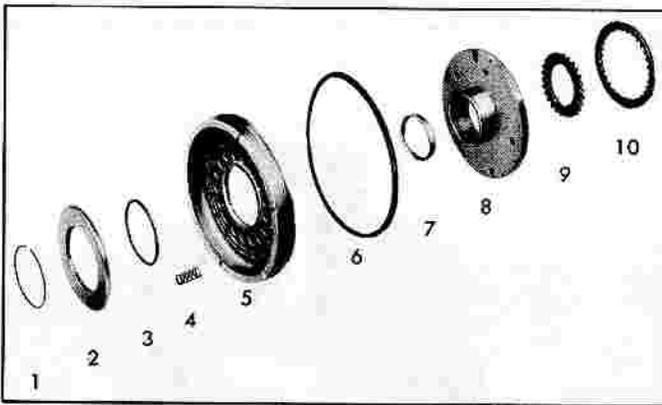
E-40—Rear Pump and Reverse Piston—Exploded View
